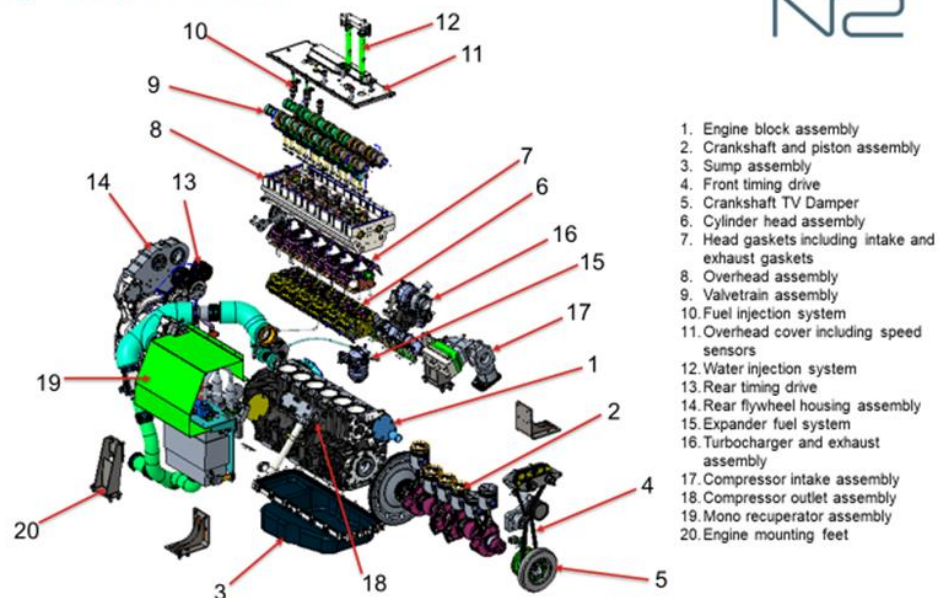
Exploded view of Upgrade 5.2 multi-cylinder
